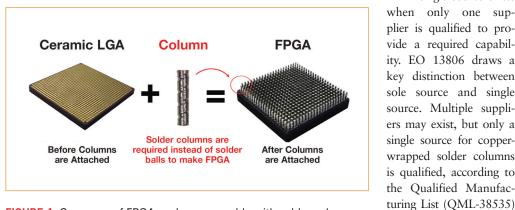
Sequence of FPGA package assembly with solder columns.
